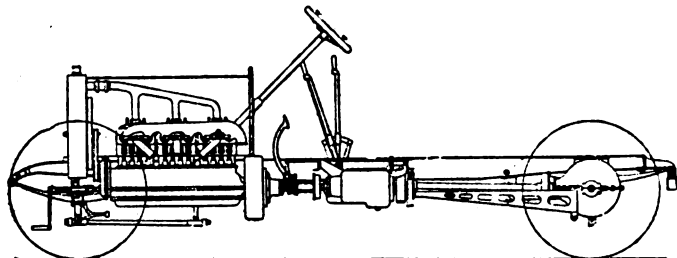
Elevation of Chassis of Bolide 35-h.p. Six-Cylinder Car.
